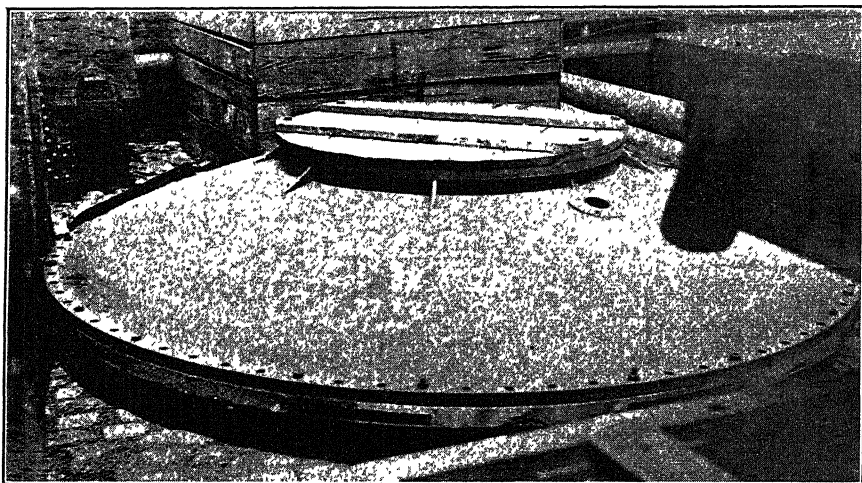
A cast-iron evaporator dome of 10 ft. diam. shipped from France and trans-shipped in New York to the West Indies: an example of careful packing.
